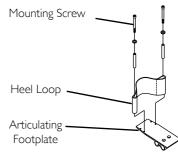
Composite/Articulating Footplate Heel Loop Replacement
